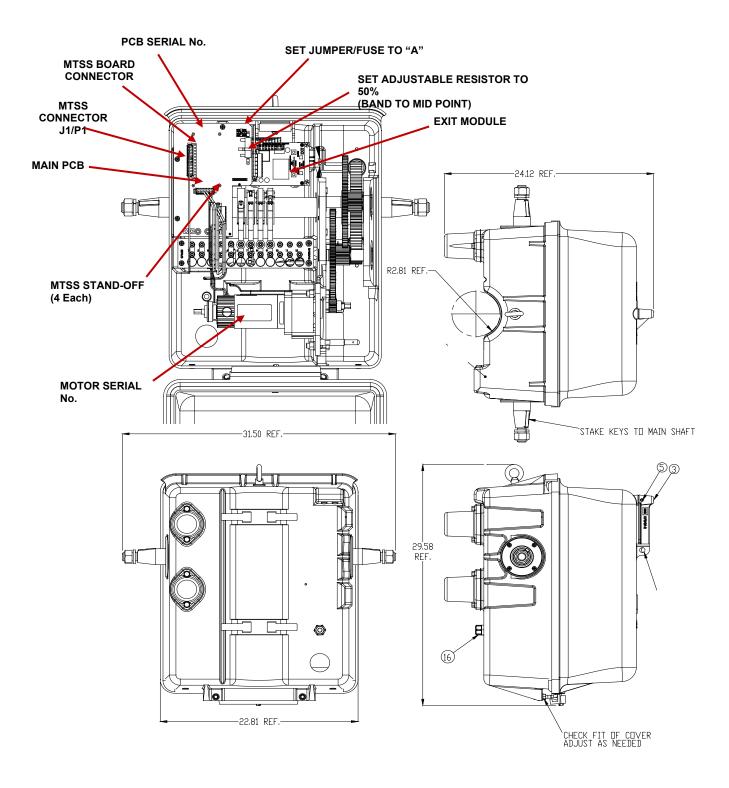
S-60 Exit Mechanism (Assembled View)
